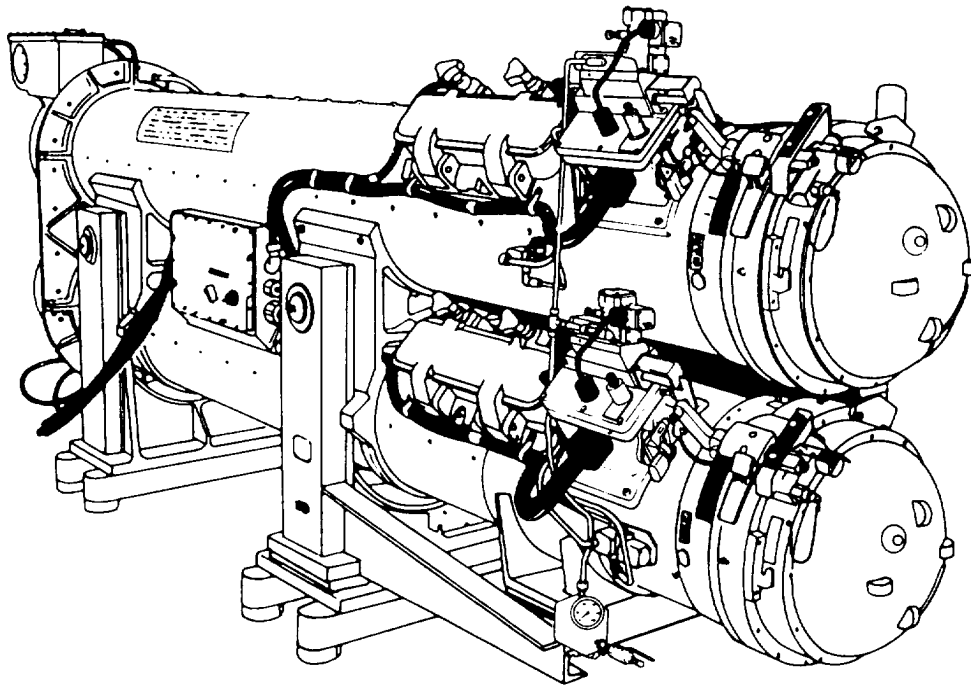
Surface Vessel Torpedo Tube Mk 32 Mod 9.
